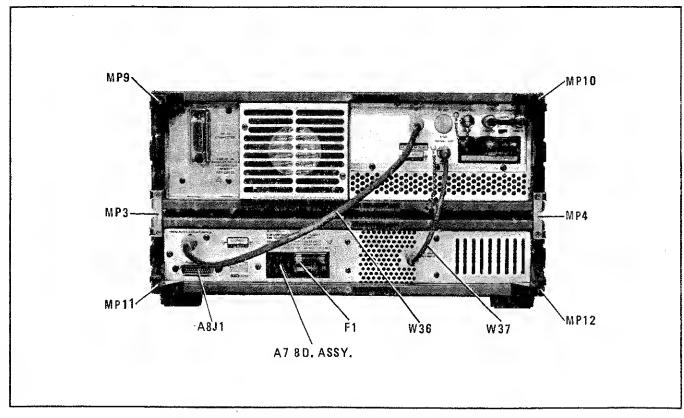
FEU Rear Panel Chassis and Mechanical Parts Identification
